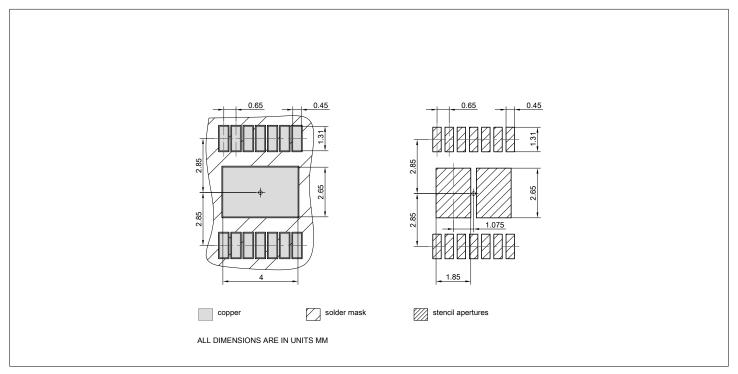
PG-TSDSO-14 (Thin (Slim) Dual Small Outline 14 pins) Package pads and stencil
